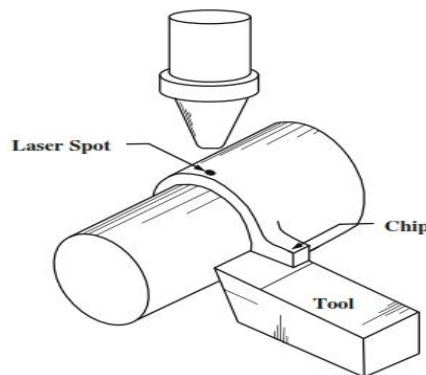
Laser assisted machining experimental setup (Sun et al., 2010)
